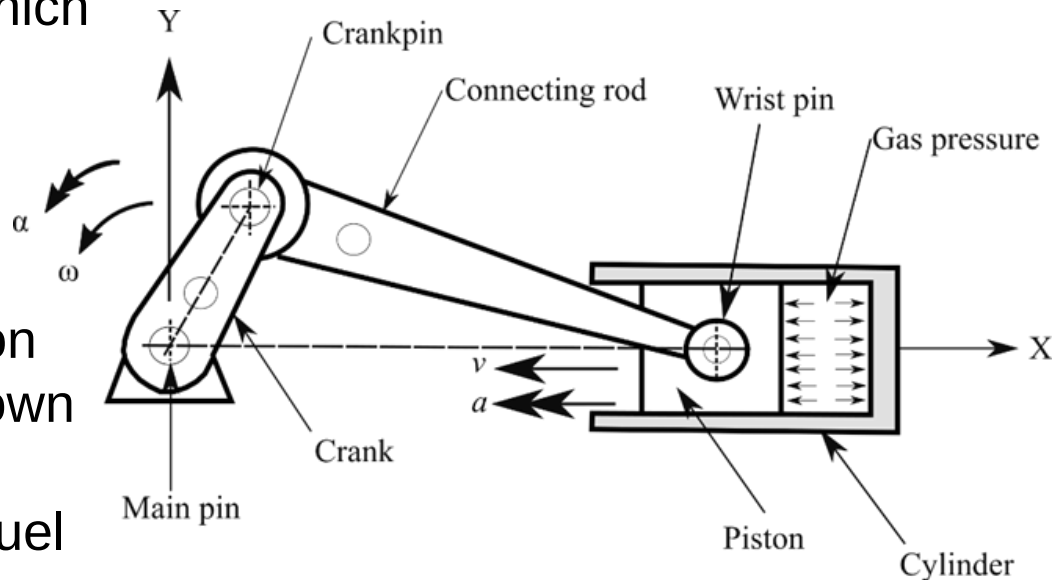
Crank-slider mechanism and single cylinder internal combustion engine components
